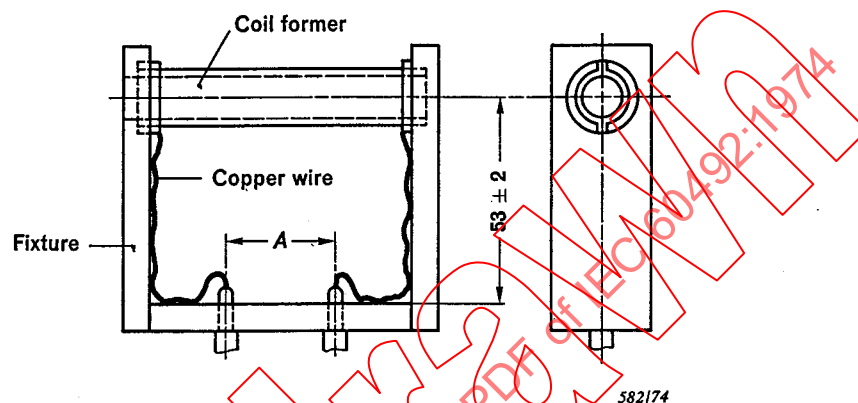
Example for the fixture of the coil former (dimensions in mm).
